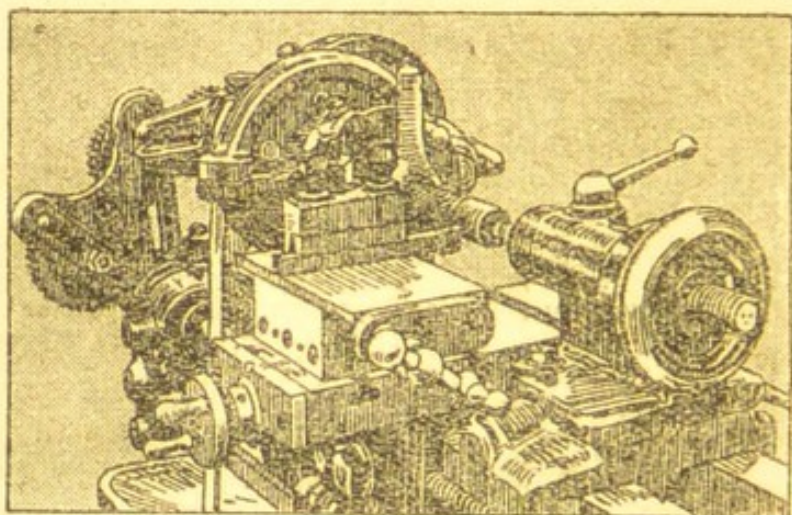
(top) Piece of work mounted and driven between centres. Fig. 9. Screw cutting in a lathe
